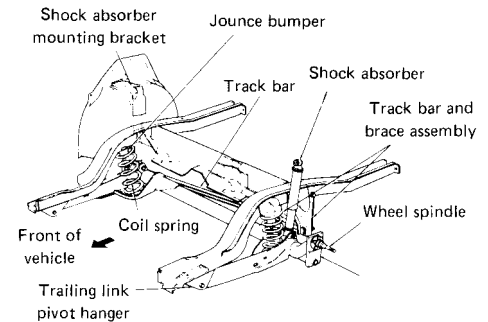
Trailing-arm type rear suspension with coil springs, used on some front-wheel-drive cars. (Chrysler Corp.)
